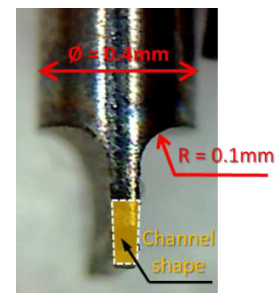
Shaped micro-tool electrode for fabricating micro-channels.
